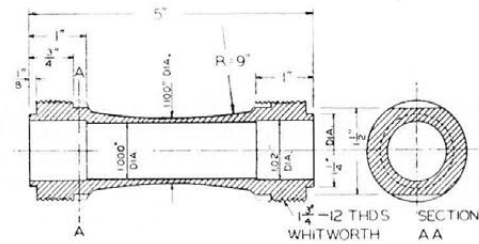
COMBINED-STRESS TEST SPECIMEN
